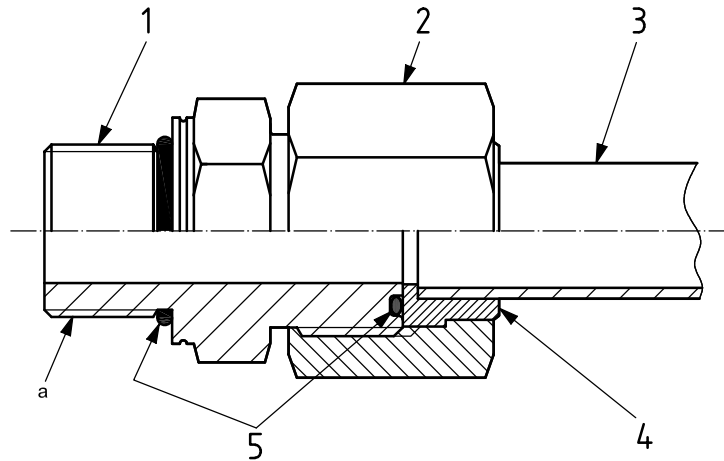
shows the cross-section and components of a typical O-ring face seal connector.
